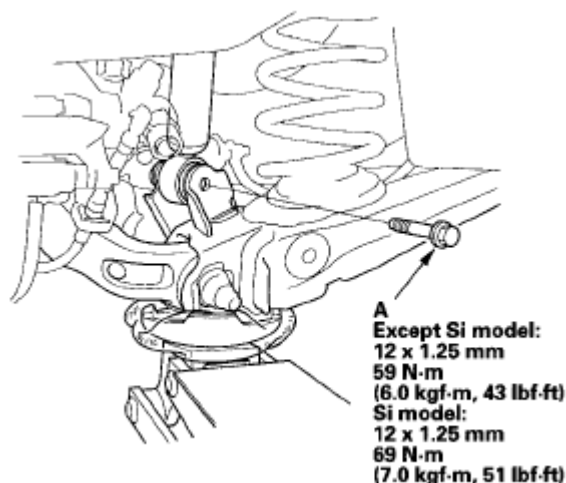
Identifying Damper Mounting Bolt (With Torque Specifications)
